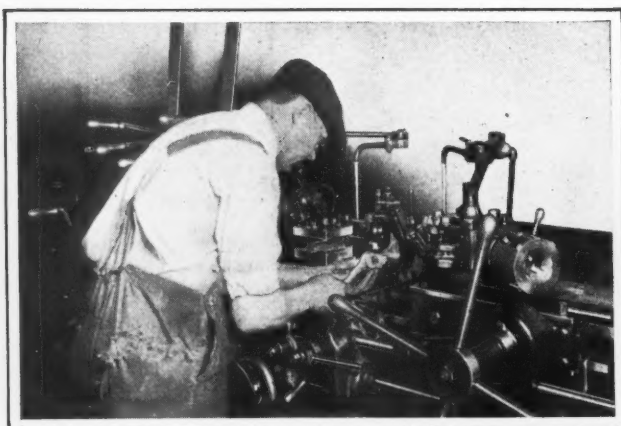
The Third Step is to Set Cutters to Turn to the Correct Size while Machining the First Piece
